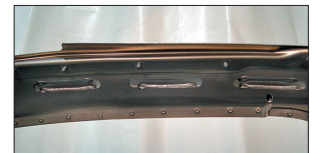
These hybrid laser/GMA (MIG) welds are in a typical location, on the edge of slots.
